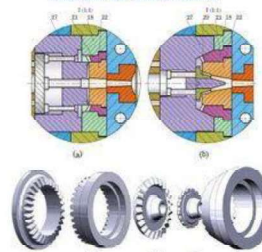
Local sections of the mold forming knot: (a), (b) - for the manufacture of fixed and movable central wheels of the 2K-H precessional gear respectively; (c), (d) - 3D views of fixed center wheel and mirror profile die; (e), (f), (g) - respectively the views of the central movable wheel, the reinforcement and the mold with mirror profile.
